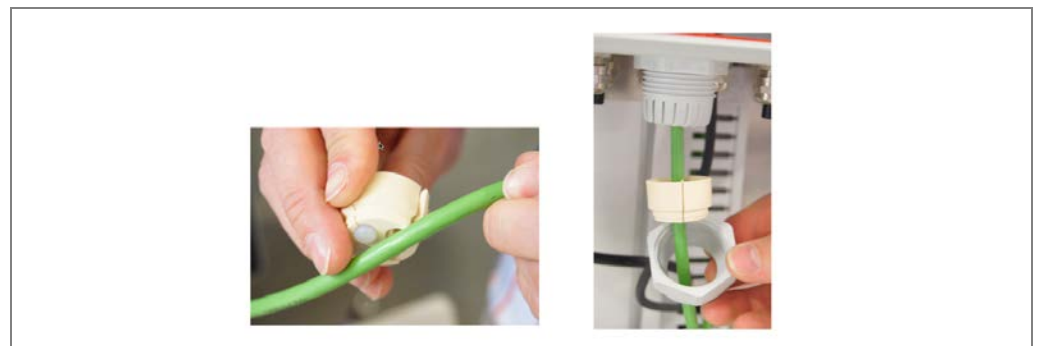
Guiding cables in the controller cabinet through sleeve and cable entries
